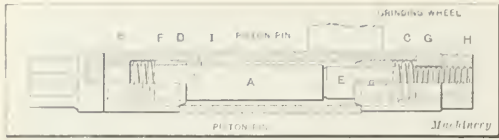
Spring Bushing Mandrel for holding Piston Pin from End, thus eliminating Clamping Strains
